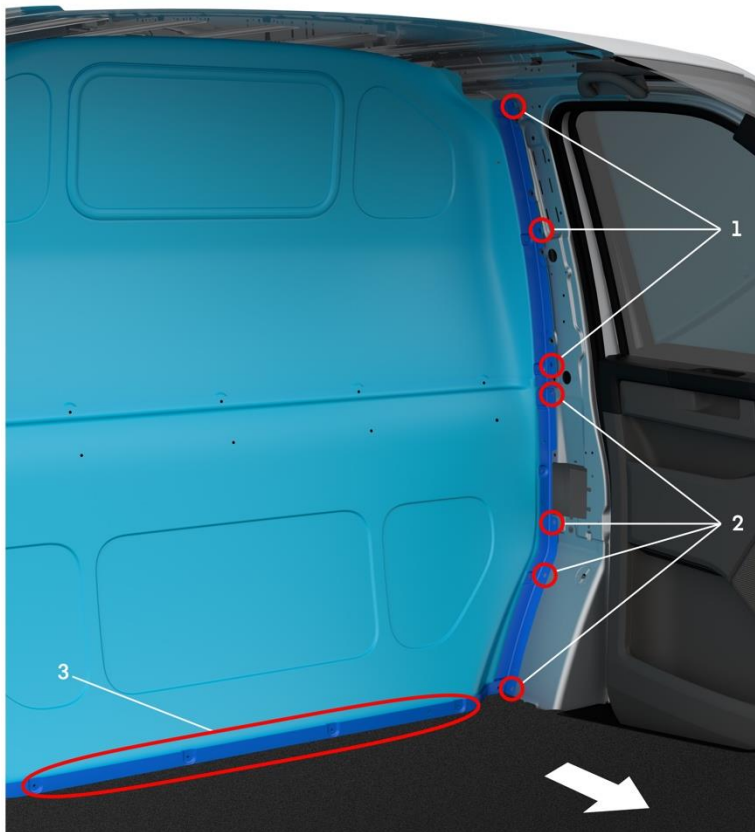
Mounting points of the standard partition – left driver's compartment view (arrow points to direction of travel!)
